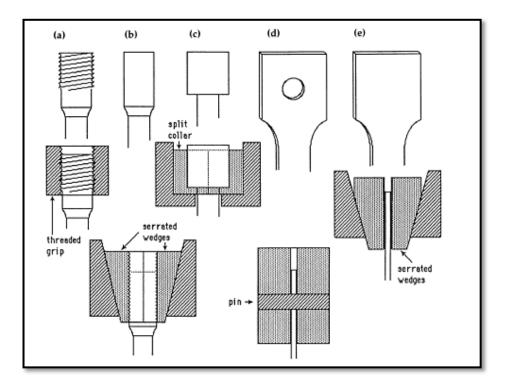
System for gripping tensile specimens. For round specimen, these includes (a) threaded grips, (b) serrated wedges and for butt end specimen (c) split collars constrained by a solid collar. Flat specimens maybe gripped with (d) pins, or (e) serrated wedges
